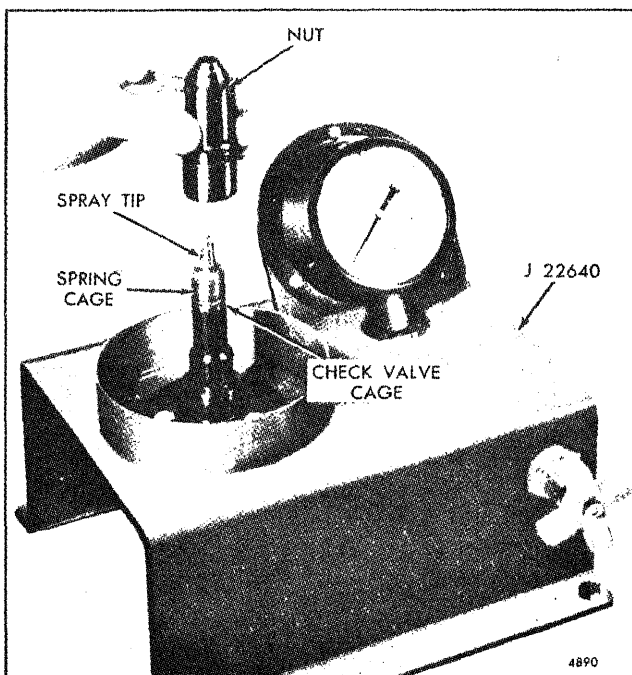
Installing Injector Valve Parts on Auxiliary Tester J 22640
